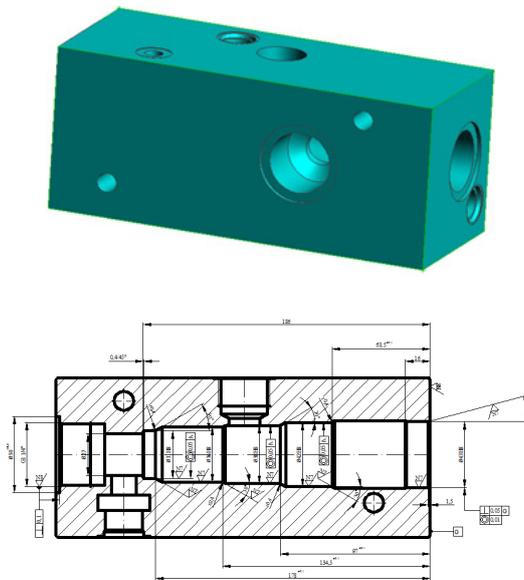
Valve casing – a machine part whose milling operations are optimized.
